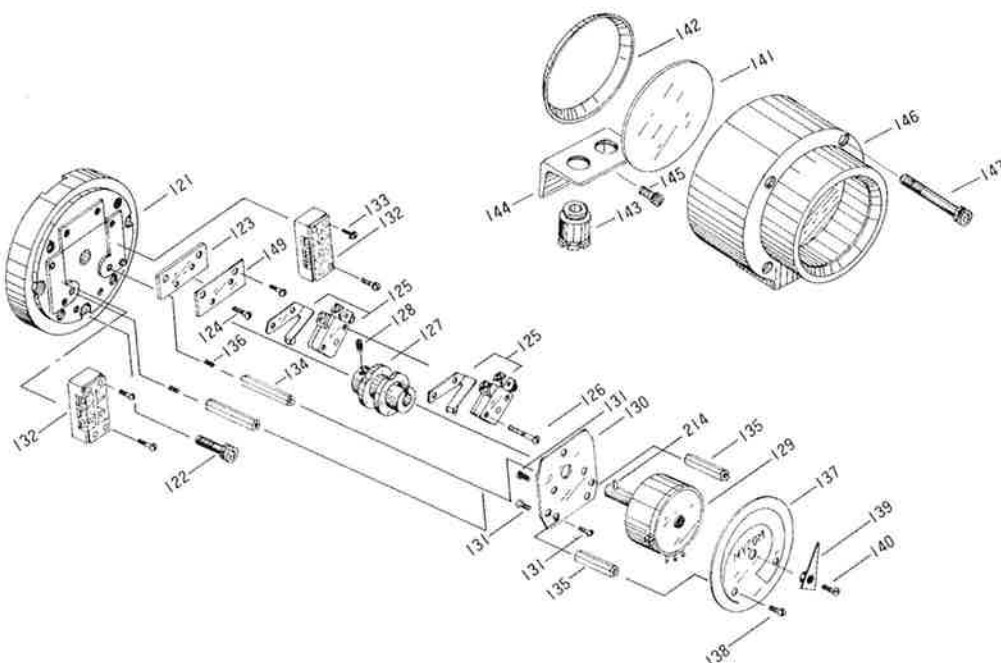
Exploded view of unloader indicator (160SUD-250LUD)
